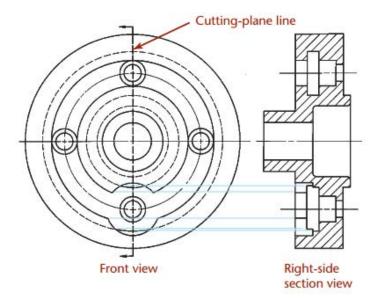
Front and Right-Side View in Full Section. Using a section view makes it easier to see interior details
